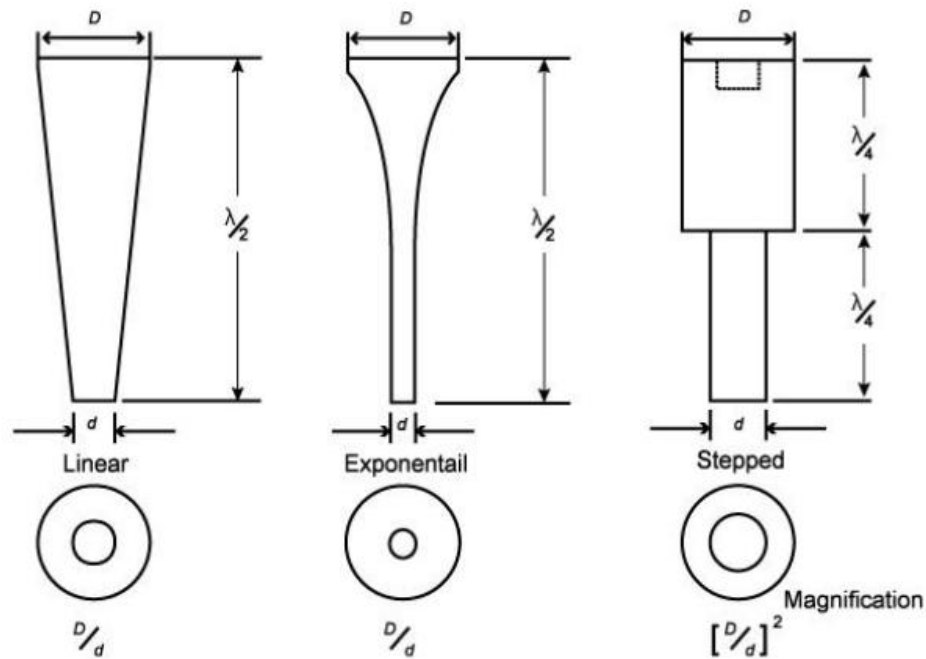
Horn used in AP-1000 Sonic-Mill machine
